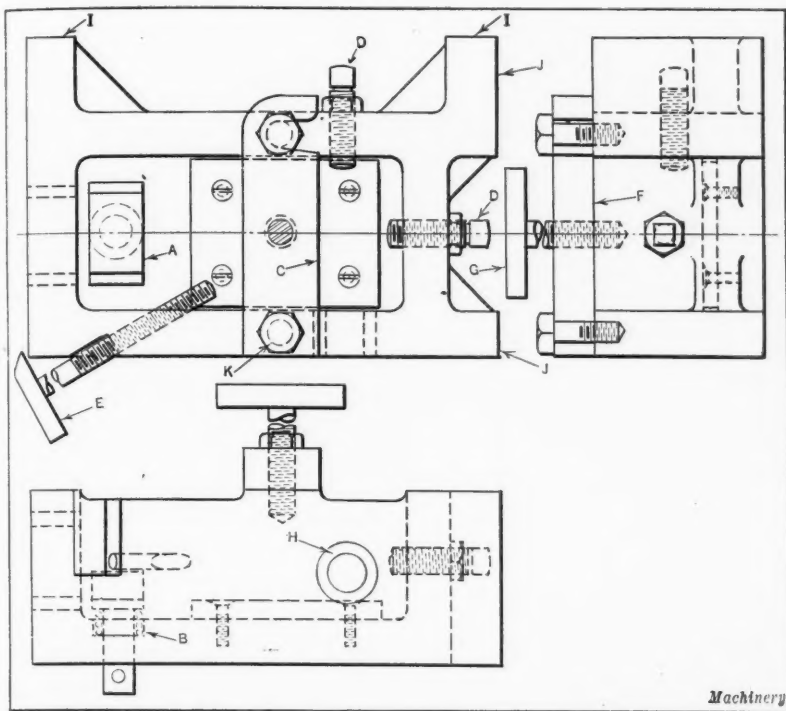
Drill Jig employed for Second Operation on Relief Valve Body
